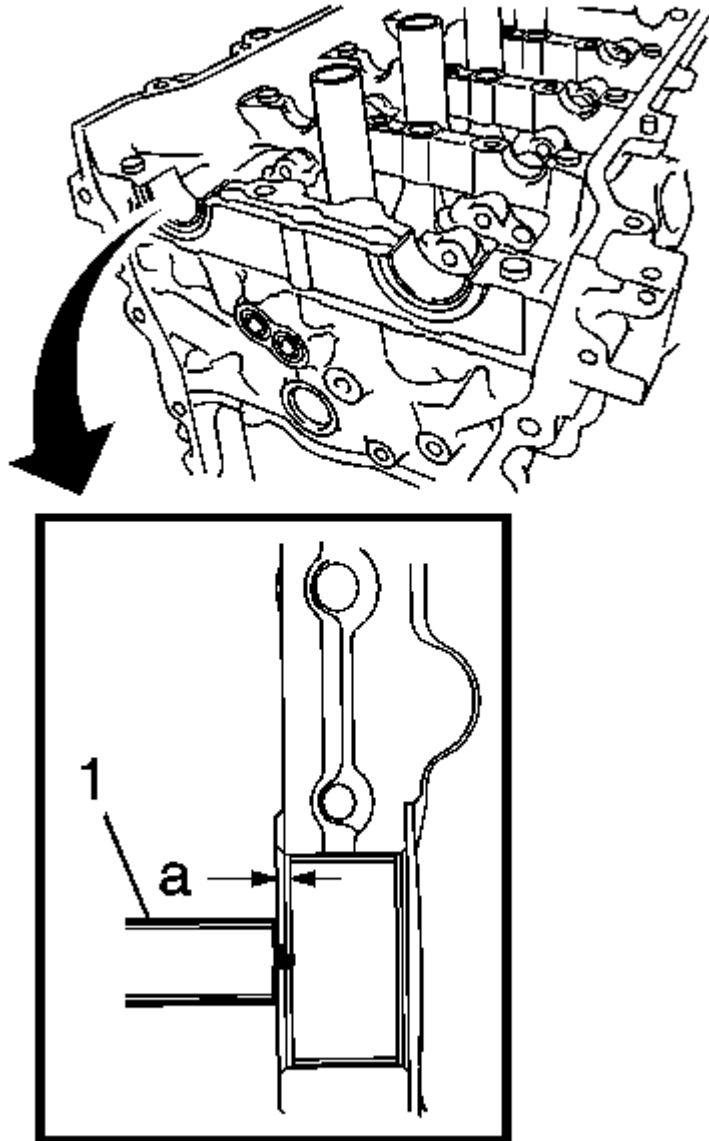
Measuring Distance Between Bearing Cap Edge & Camshaft Bearing Edge
